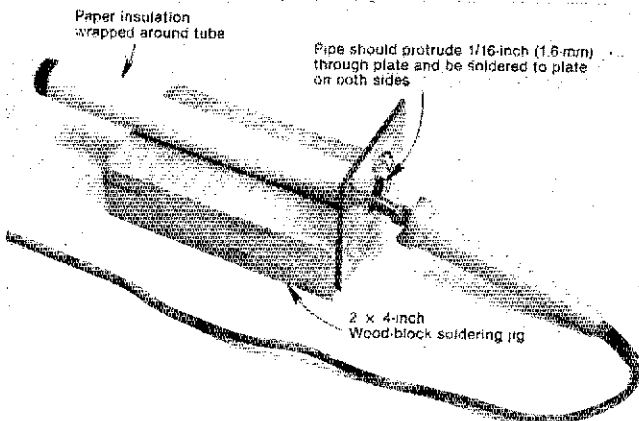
The tube-support plate and tube are soldered together using a 2 x 4-inch block of wood as a jig. The block is checked for squareness, and a groove is cut down the middle. (See Fig. 3.) Paper is wrapped around the tube to reduce heat loss during the preheating process.
